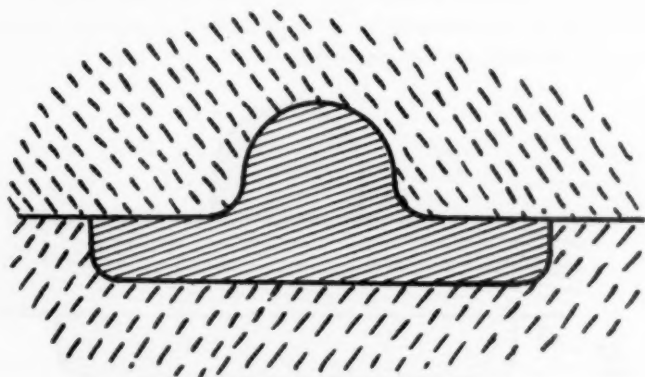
FILLETS IN "OPEN" CARDED PATTERNS
